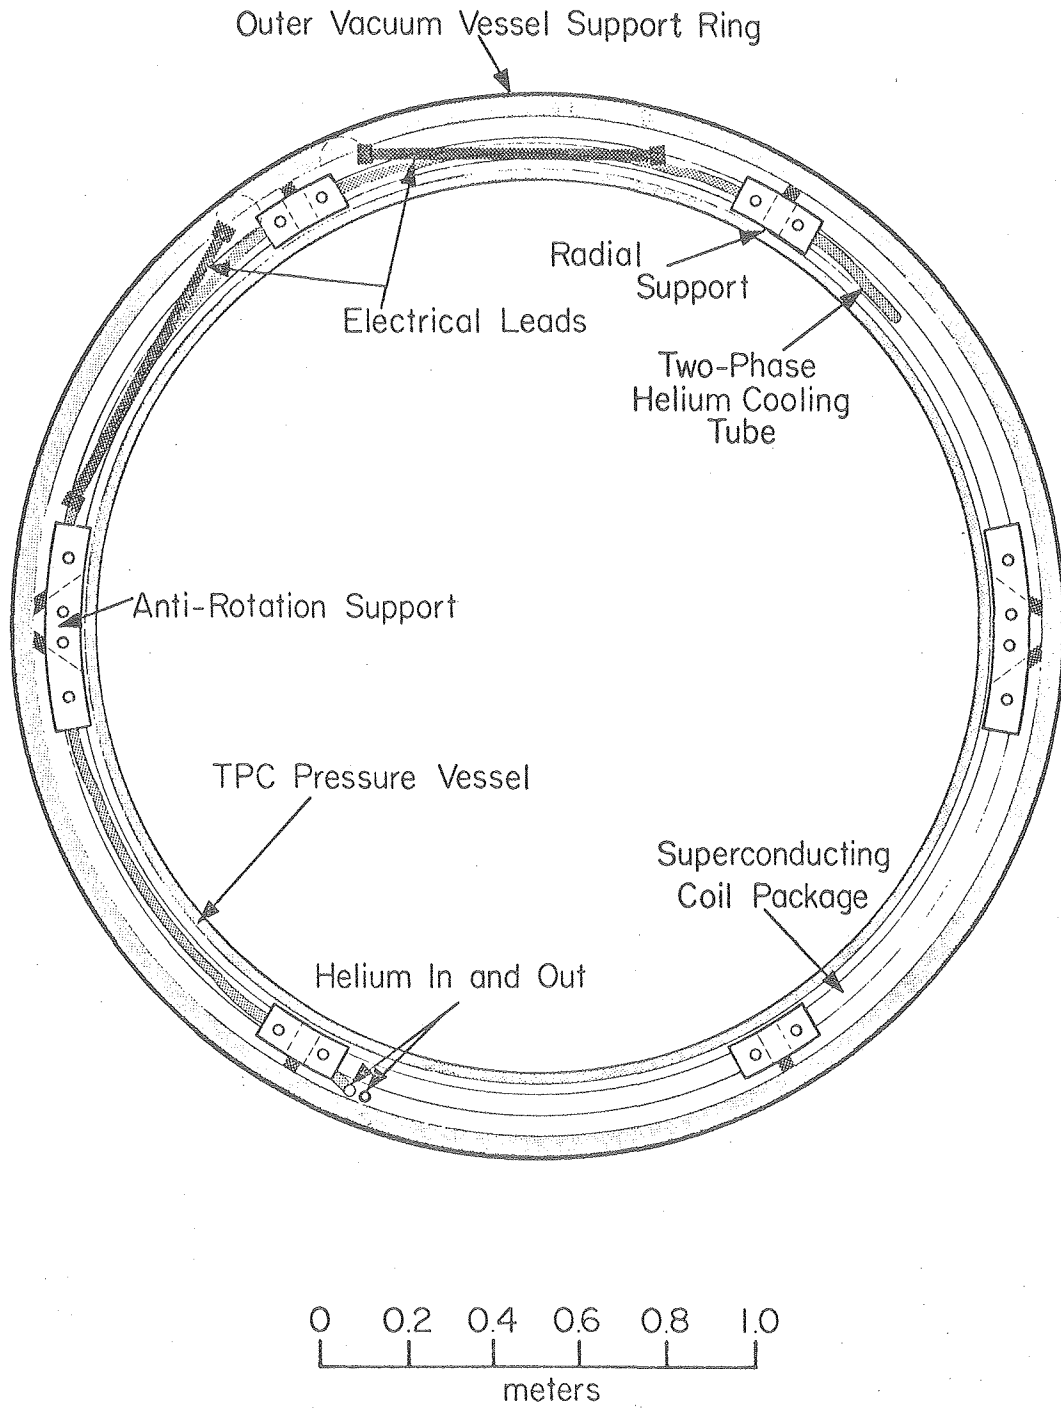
A Cut Away End View of the TPC Magnet Cryostat Showing the Location of Supports, Electrical Leads the Coil Package and Inner and Outer Vacuum Cans
